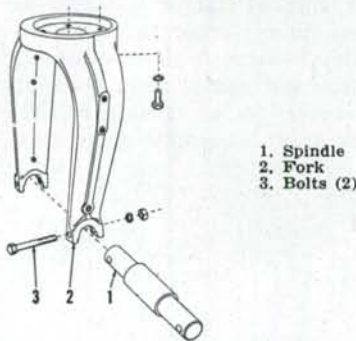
Exploded view of single front wheel fork and associated parts.
